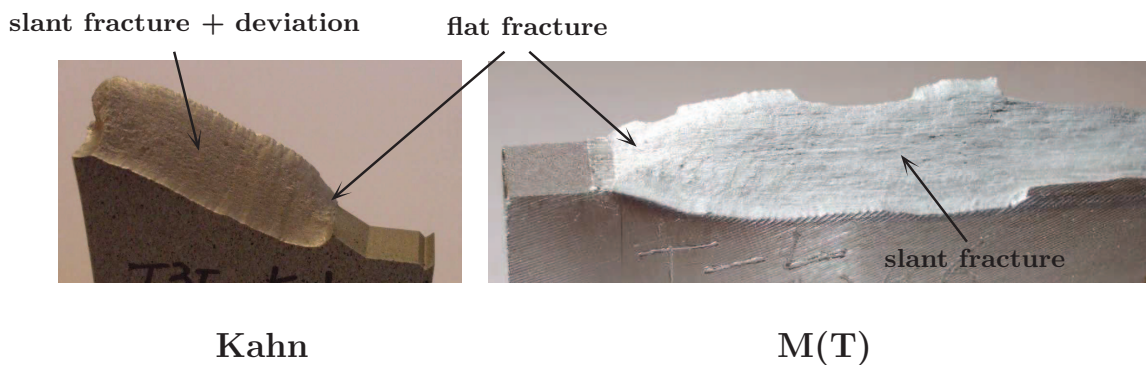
Typical fracture surface of Kahn and M(T) tear test samples.
